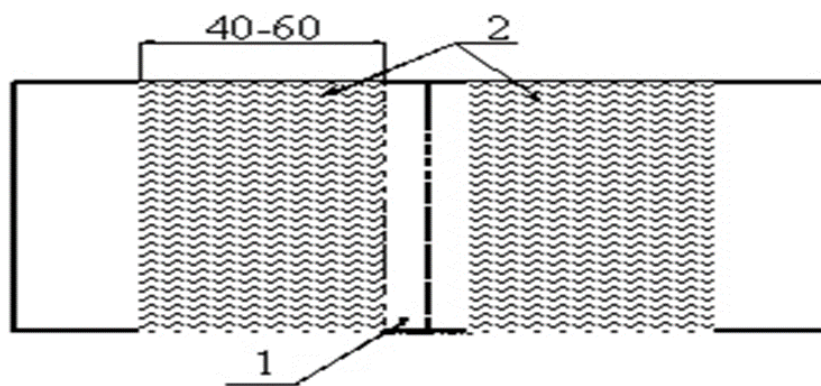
The scheme of applying a protective coating for MMA: 1 – weld; 2 – protective coating.
